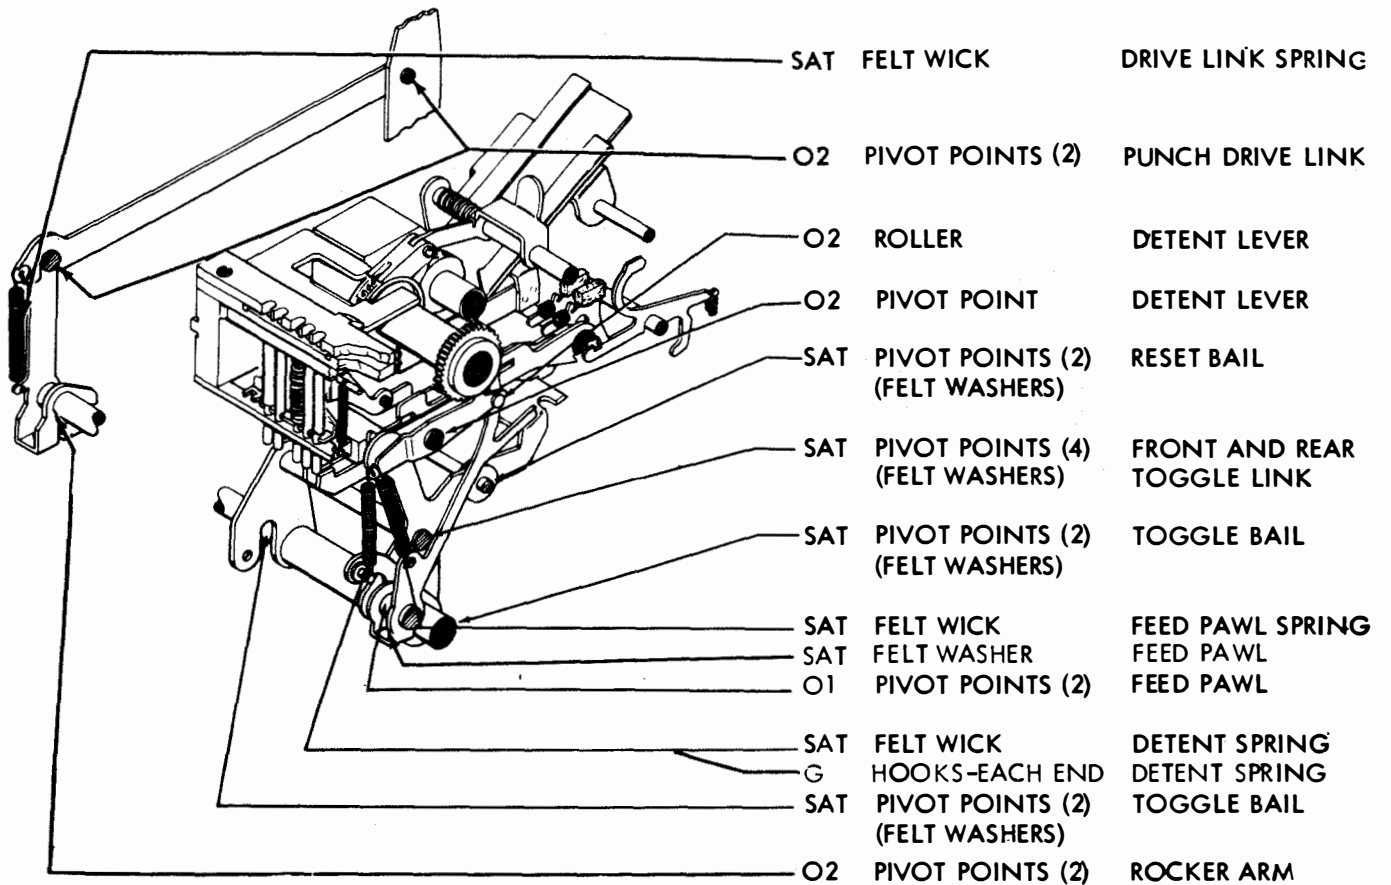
Punch Drive Link, Feed Pawl and Components for Chadless Tape Mechanism
